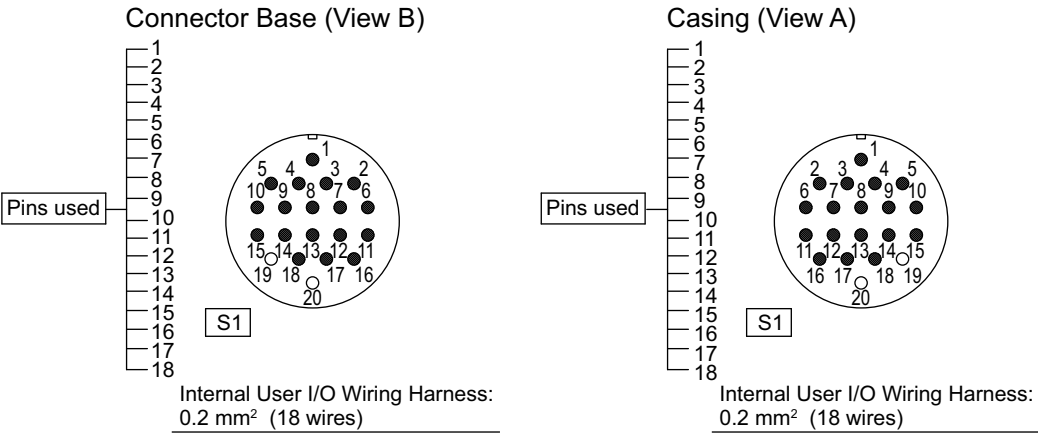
Connectors for Internal User I/O Wiring Harness and Air Hose
